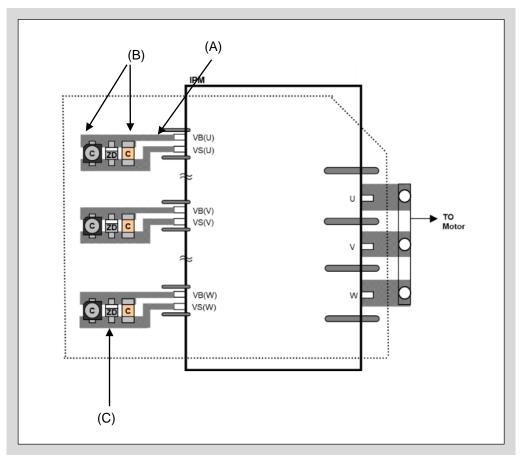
Image of recommended PCB layout (High-side bias voltage part)
